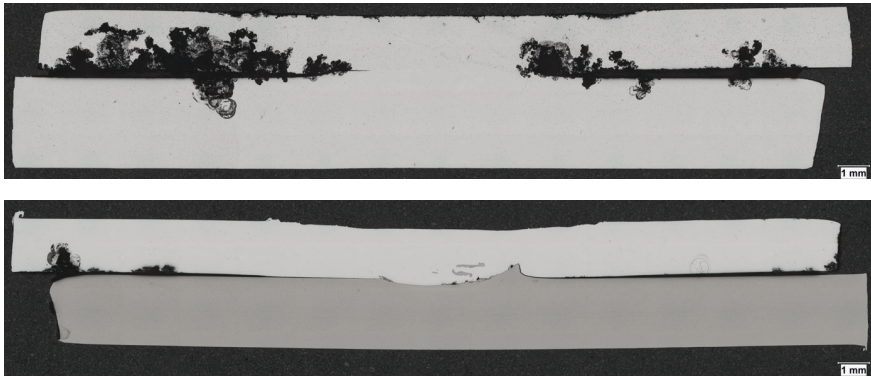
Cross-sectional view of multimaterial friction-stir welded (FSW) assemblies after a 100,000 km road exposure between a wheel and a mud flap. Top: Dominant crevice mechanism in a AA7000 series to AA6000 series FSW assembly, Bottom: Dominant galvanic corrosion in AA5000 series to stainless steel 300 series FSW assembly.
